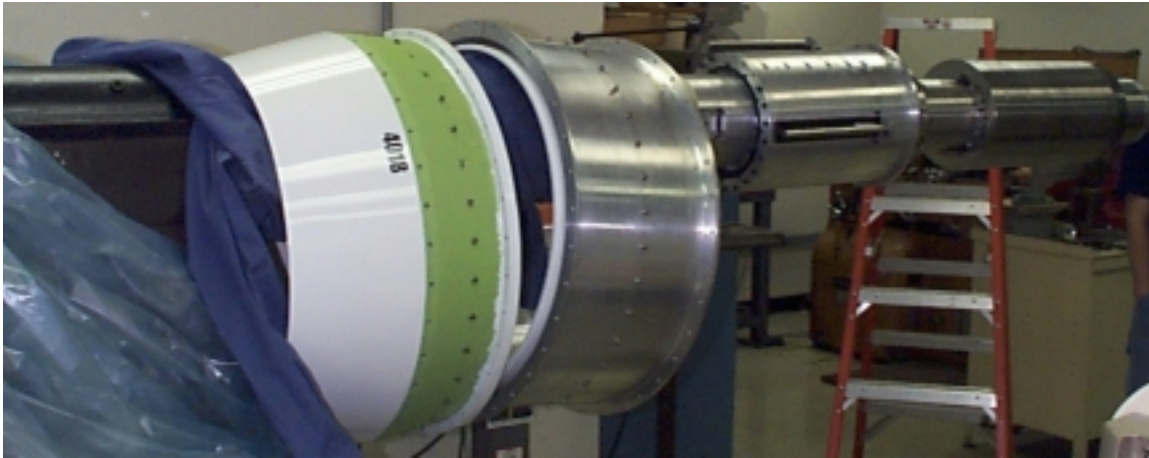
Placing Parts on Drive Rig for Later Assembly.
